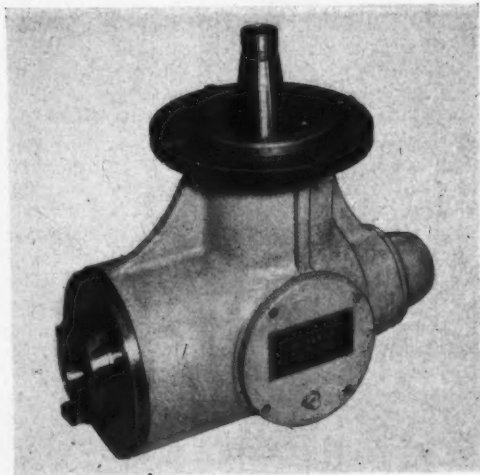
Right-angle attachment for the Futurmill planer/miller conversion unit
